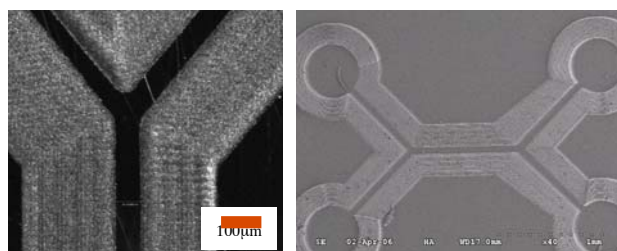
Magnetic particle separation channel mold on stainless steel (left) and replica of mold on PMMA (right)
